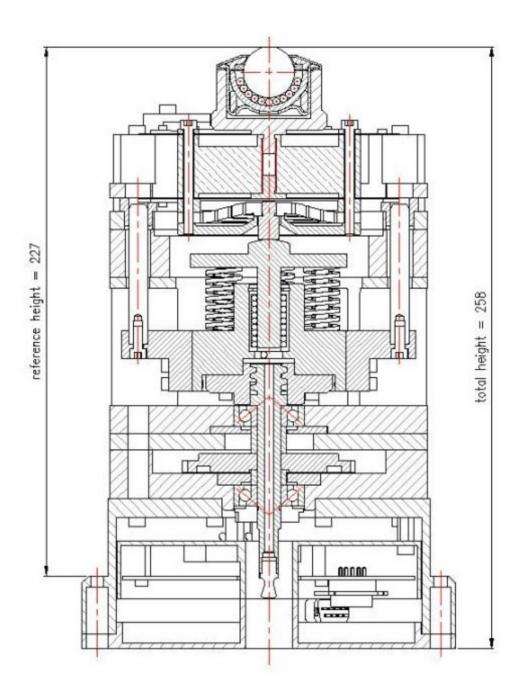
Axial Force Actuator to be mounted on rings nr.2 and nr.3, cross section view
